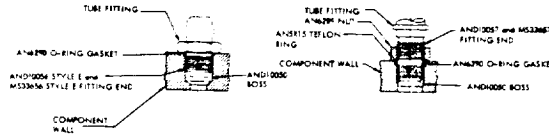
Typical installations of tube fitting ends into AND10050 boss.
